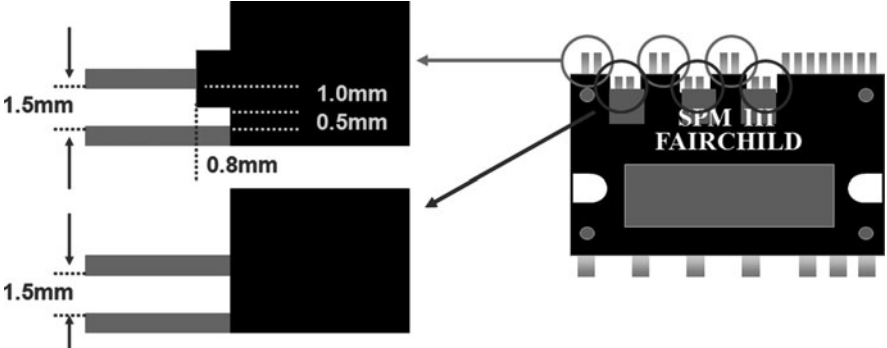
The design layout between pins for a Fairchild SPM package
